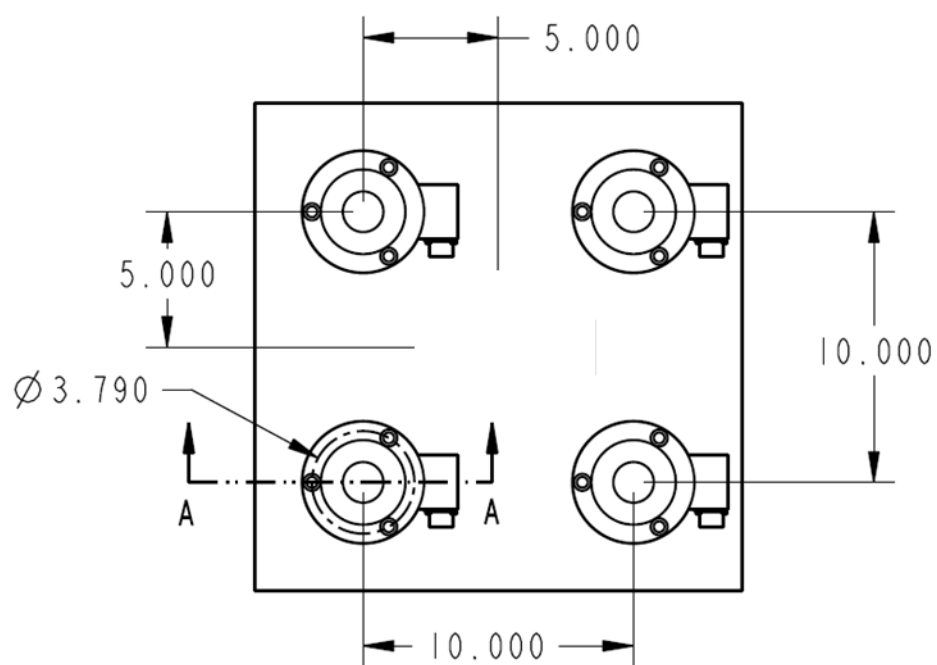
Preliminary Load Cell Configuration with the Bearing
